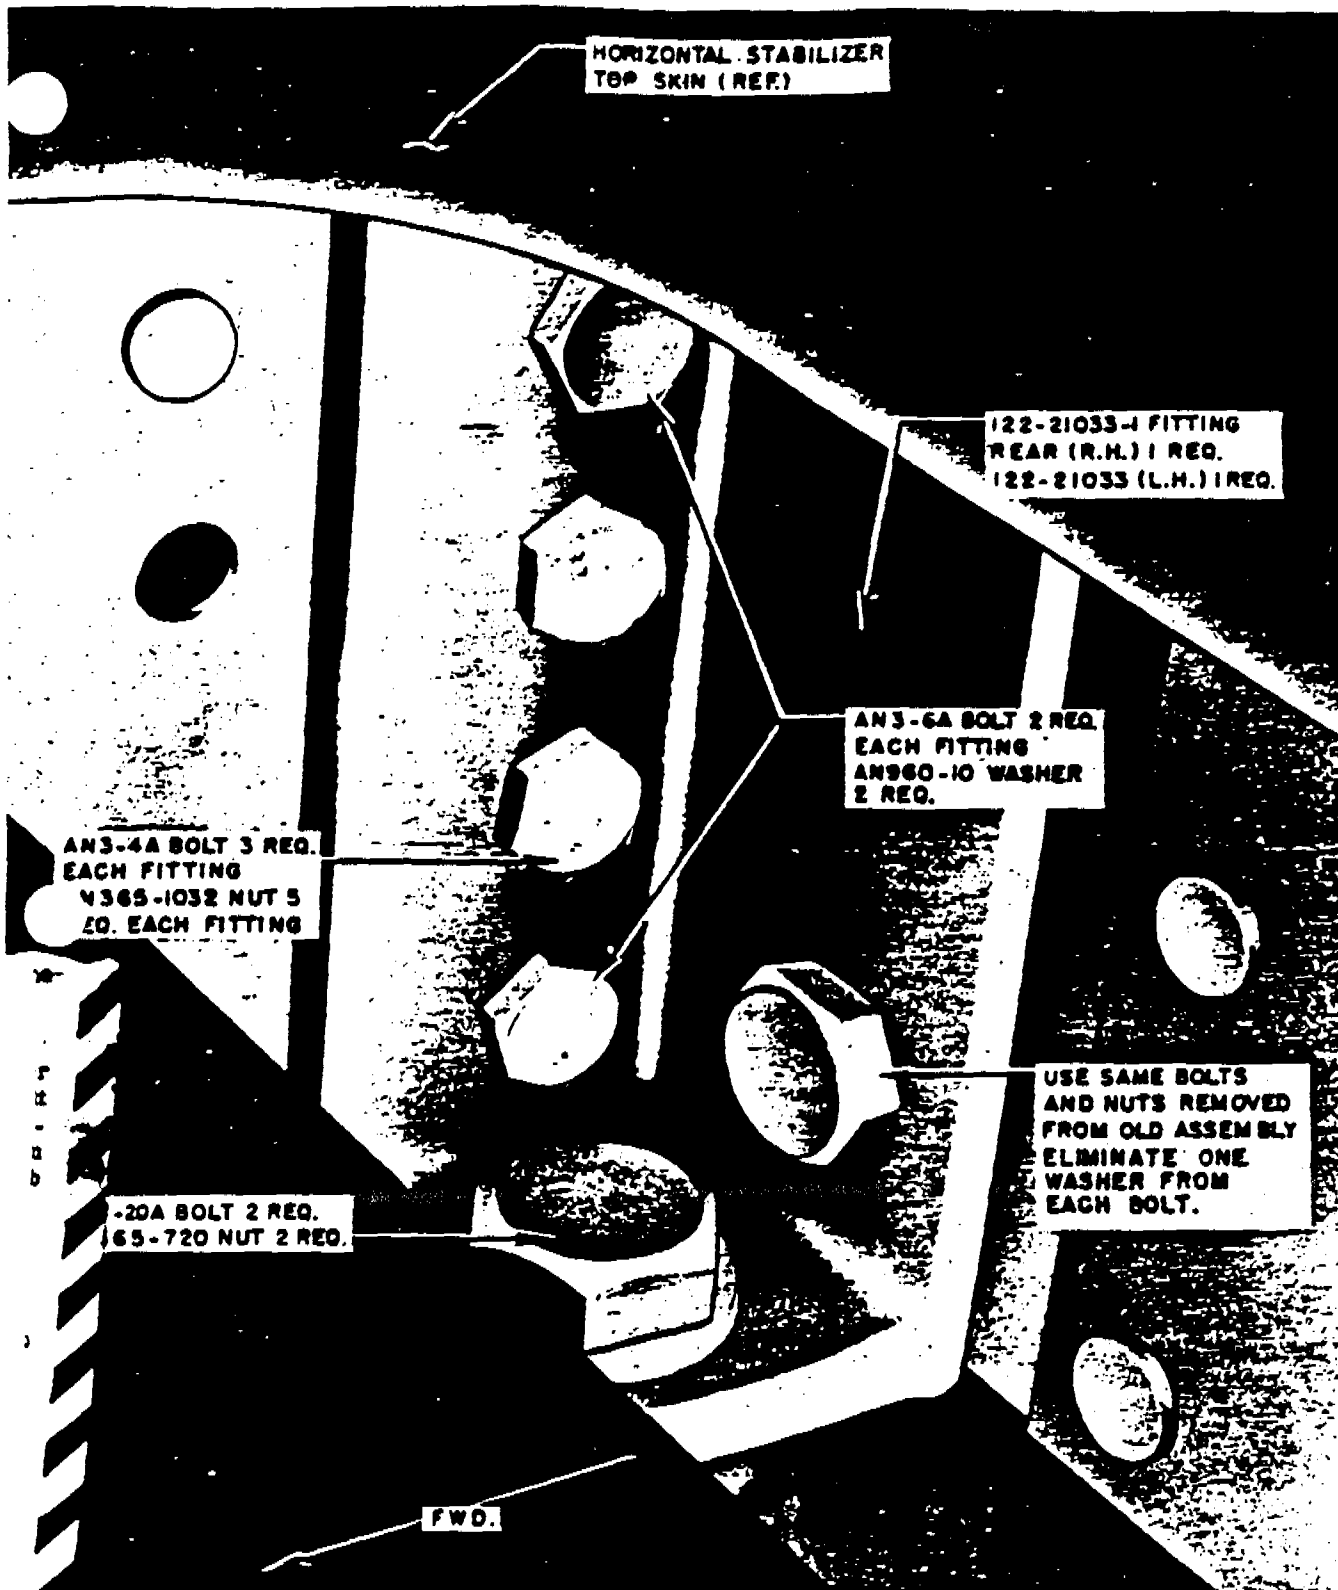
View Showing Rear Casting Installed - Horizontal Stabilizer
